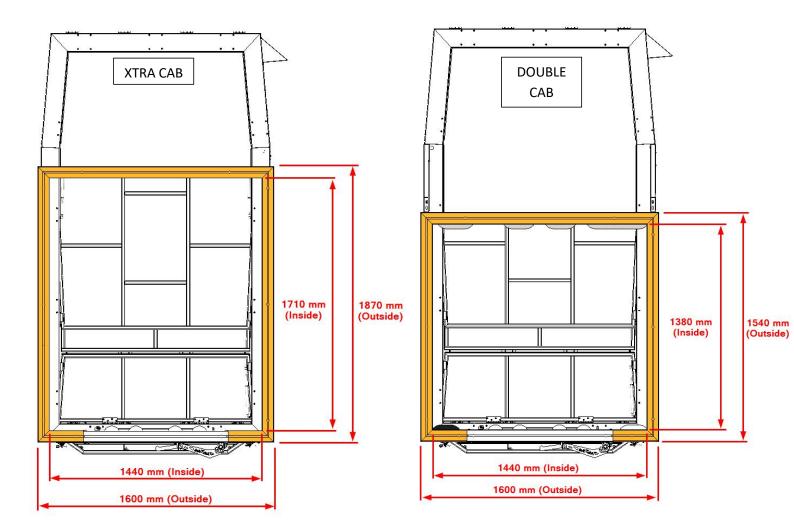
Canopy Camper Base Unit Mounting Surface - Dimensions (Bottom View)
